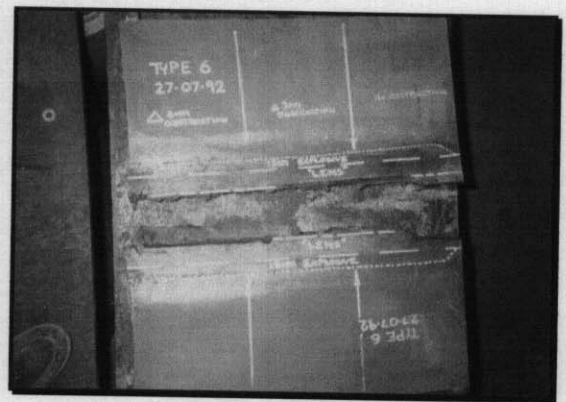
Test 19, charge Type 6 dimensions.
